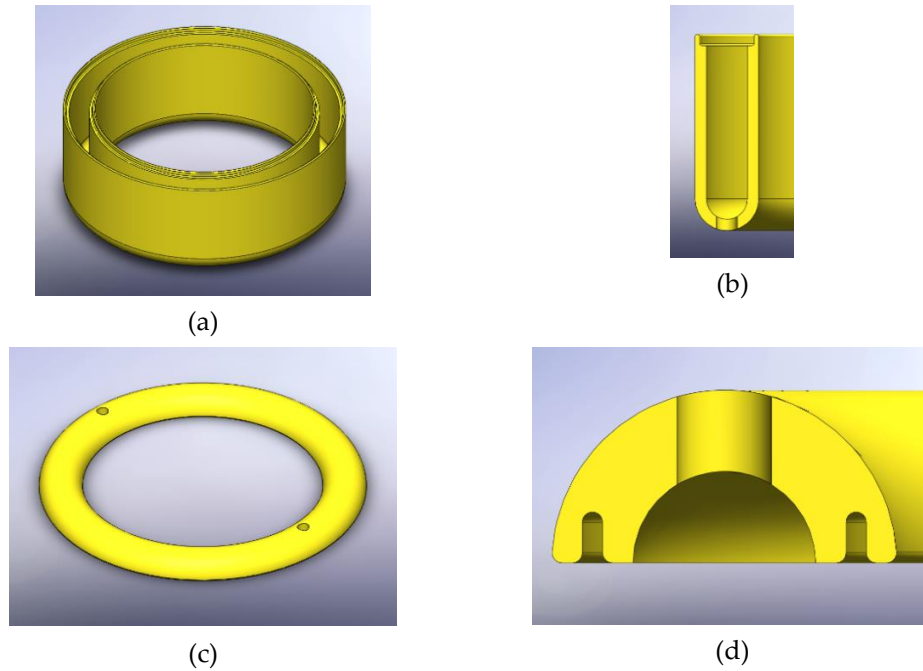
(a) Main body isometric view; (b) main body section; (c) top cover isometric view; (d) top cover section, modeled in Solidworks™ environment.
